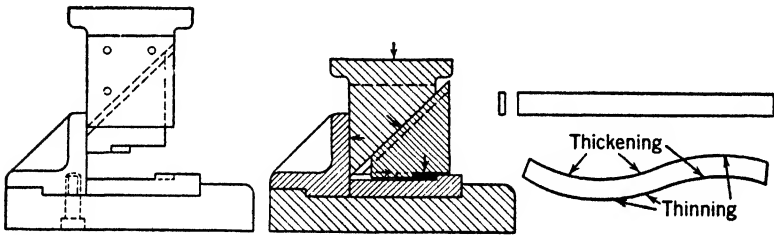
An edgewise bending die combining bending pressure with a holding pressure which compensates for non-uniformity and change of metal thickness.
